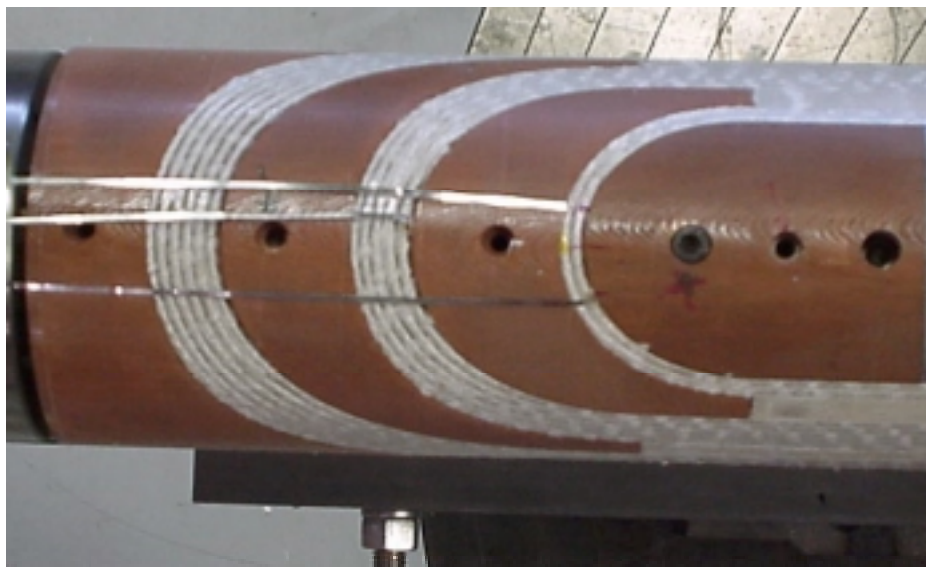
Close up bottom view of the Return End of the cured Inner Layer for PC03.
